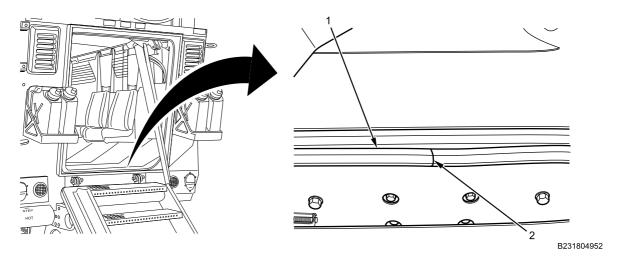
Rear Door/Ramp Seal Seam Adhesive Cut.
